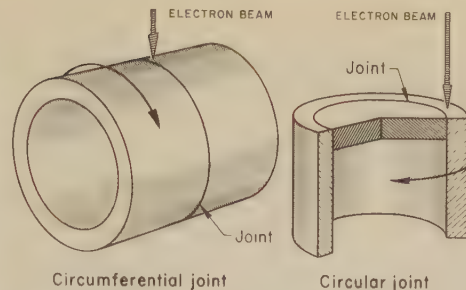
Circumferential and circular joints in position for electron beam welding
